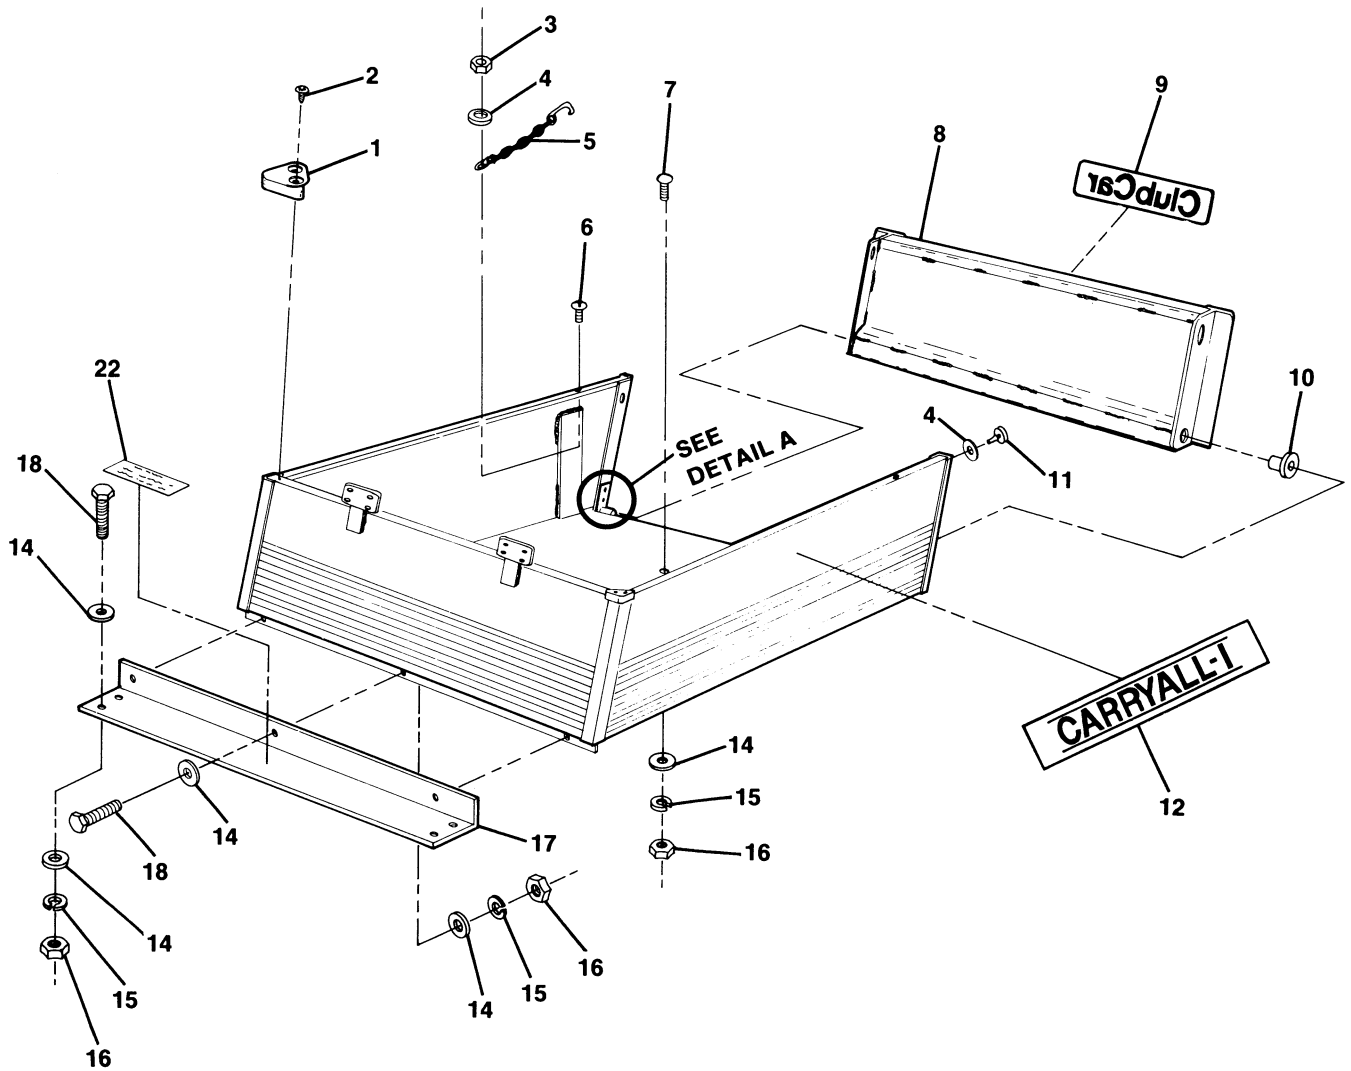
BOX ASSEMBLY. SEE LIST 1-3.
